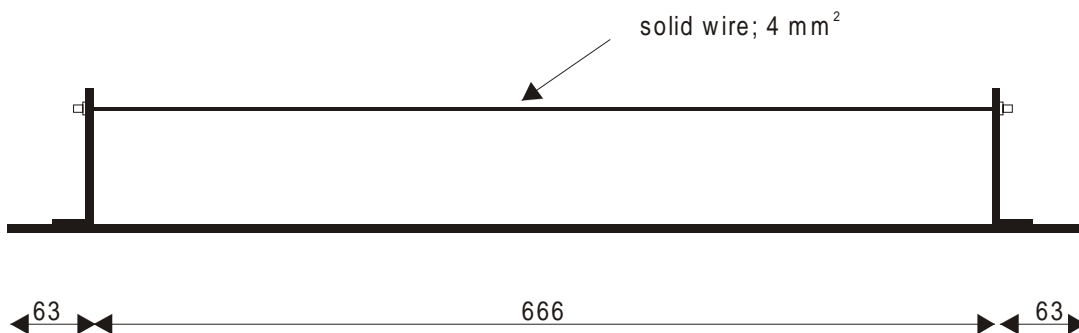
Side view of the calibration jig (all dimensions in mm)
